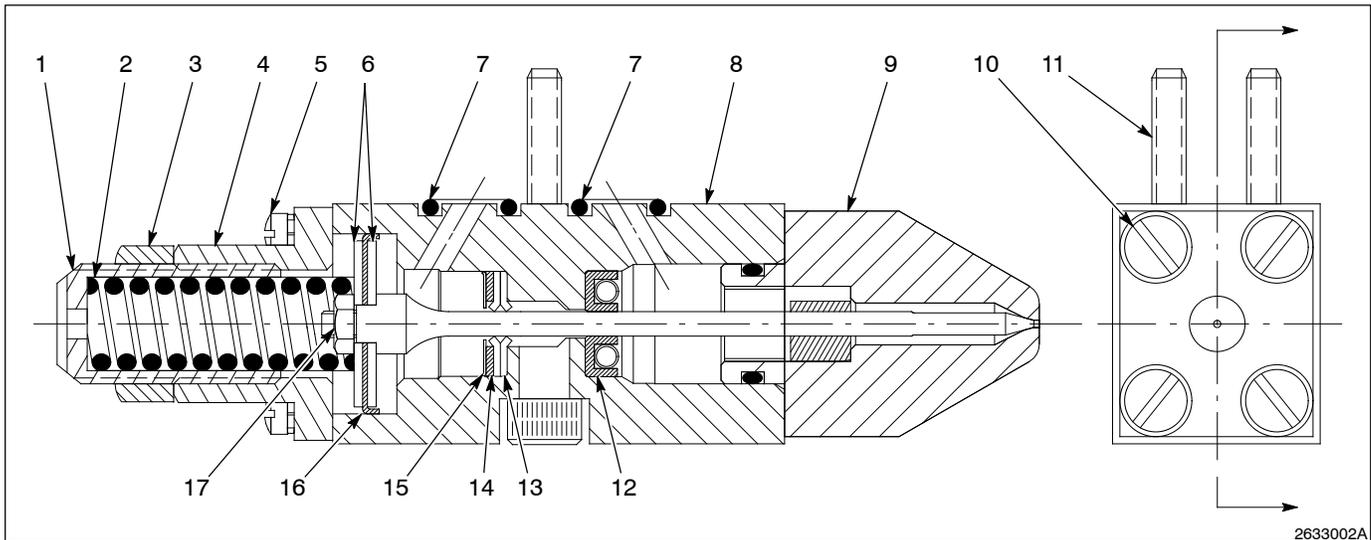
ZCN Dispensing Gun, Cutaway View (Standard Gun)
